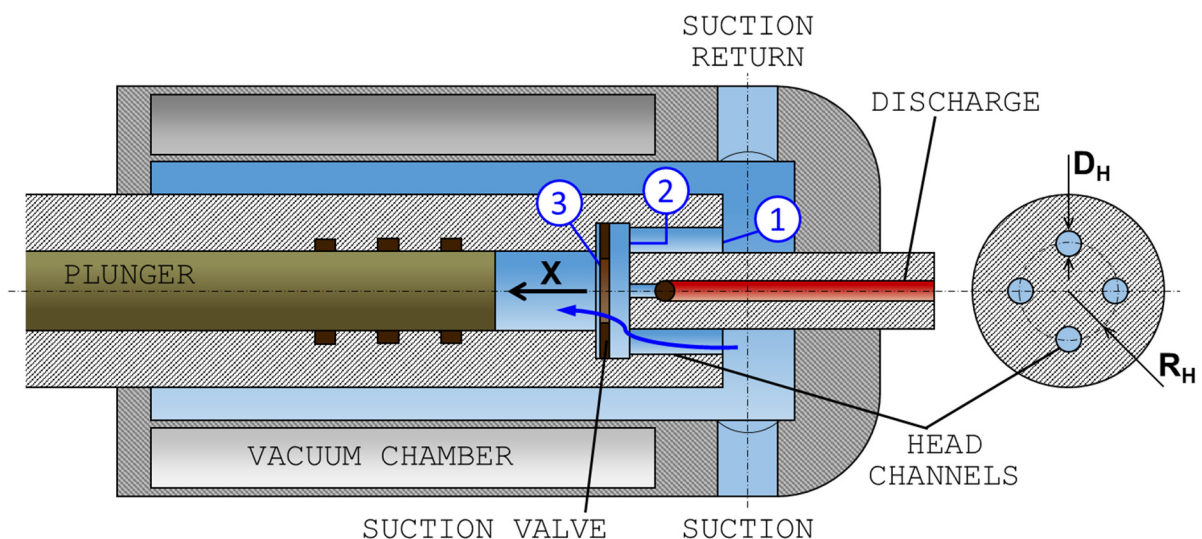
Cryogenic piston pump scheme. Sections 1,2 and 3 identify the head channels inlet and outlet and suction valve respectively.
